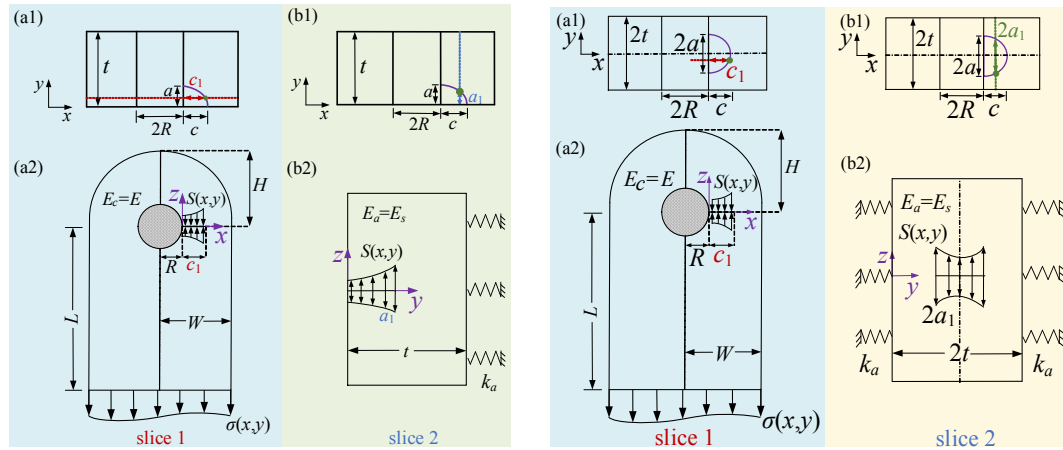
Slice model for surface crack at a pin-loaded lug; (a) corner crack and (b) surface crack
